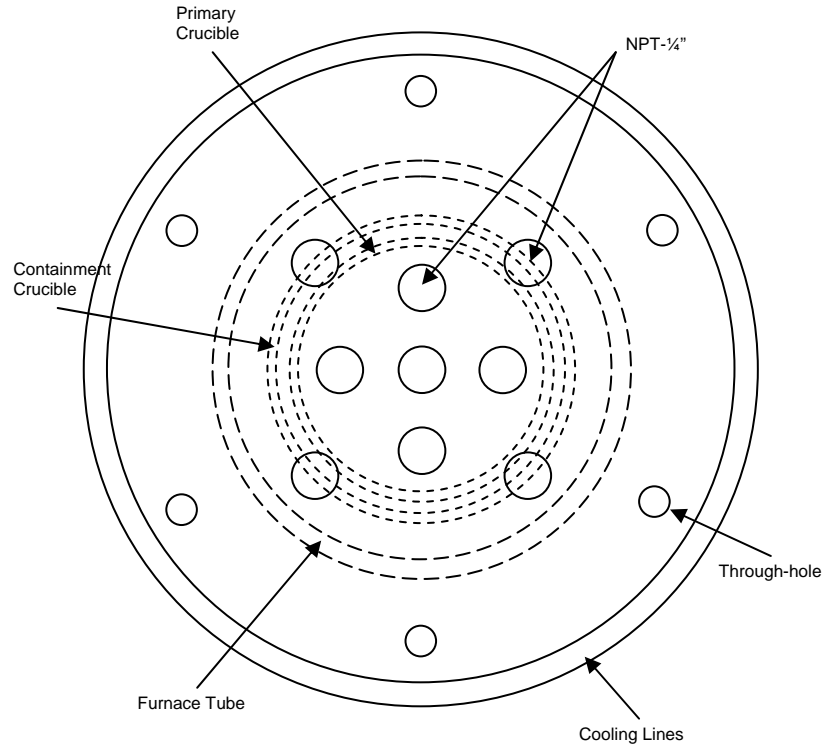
Top view of the cap. The center NPT – ¼” holes were used for inserting electrodes and the outer NPT – ¼” holes were used for the gas inlet and outlet.
